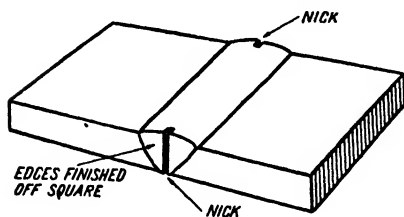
Specimen for 'nick bend' or 'nick break' test
